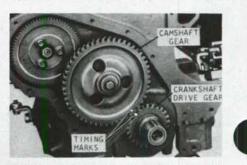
Timing gears with cover removed, showing timing marks on turbocharged model. Other models are similar.
